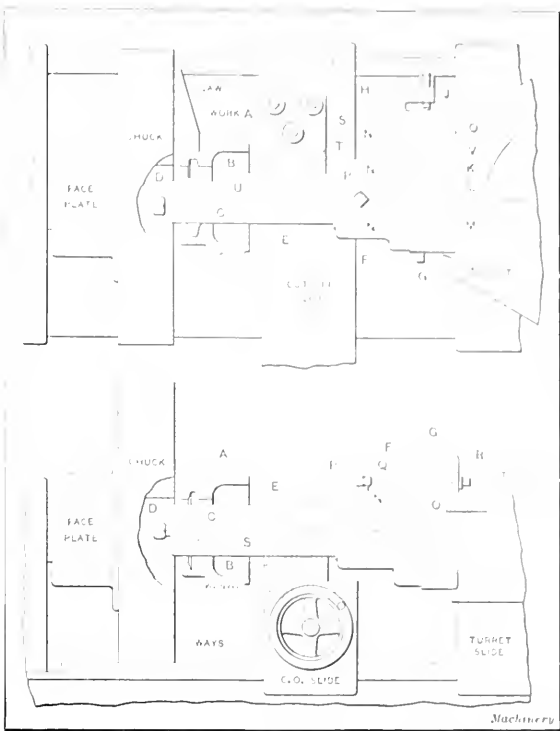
A Recessing Tool for an Automobile Bearing Retainer
